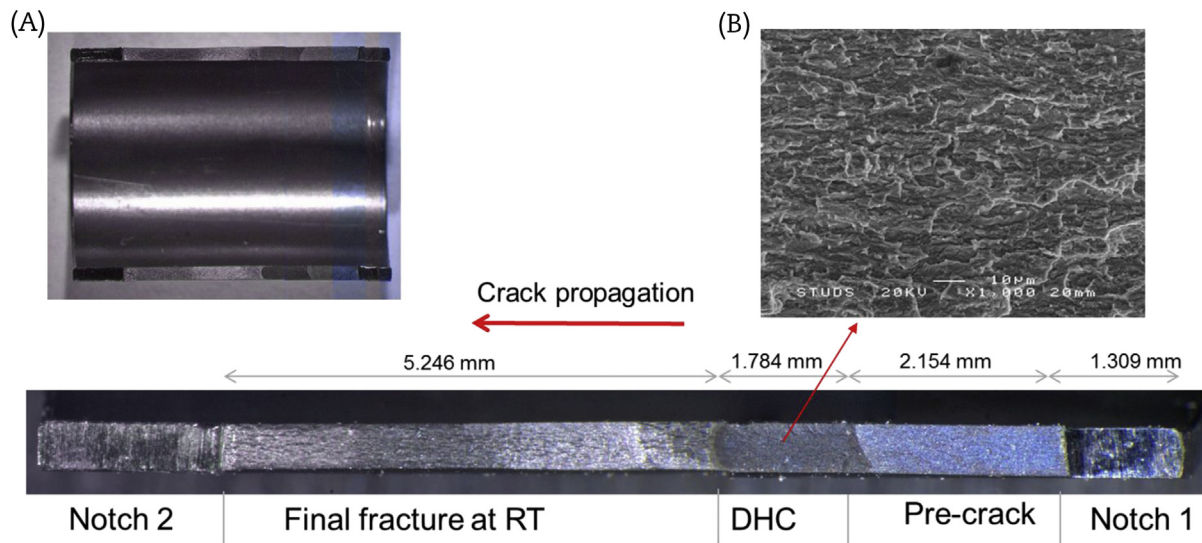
Images showing fracture surfaces after the test. (A) Two parallel fracture surfaces starting at the two opposite notches in the PLT sample. (B) The DHC area in higher magnification. DHC, delayed hydride cracking; PLT, pin-loading tension.
